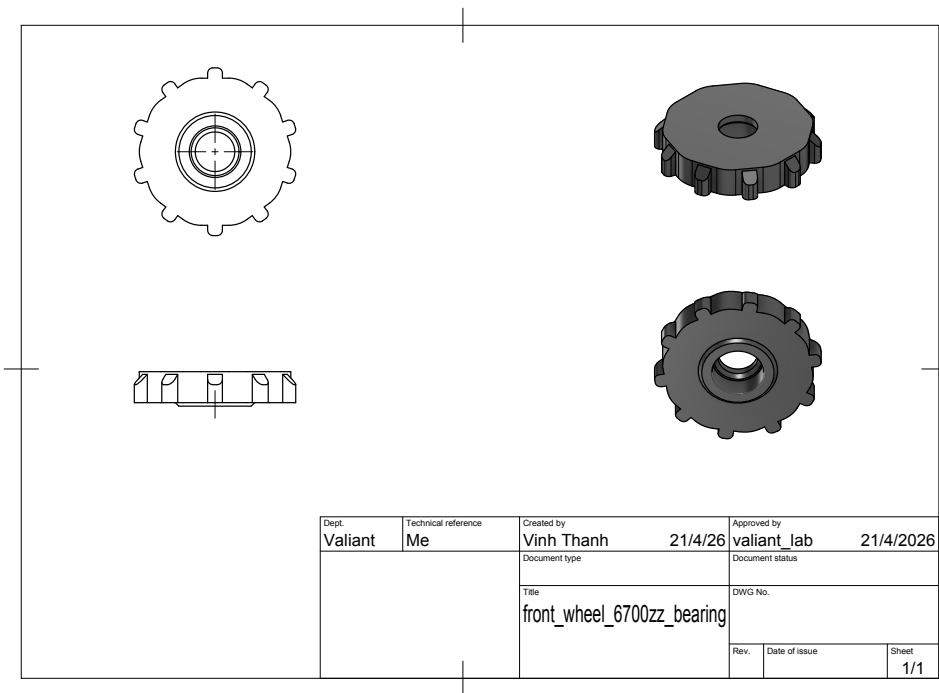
Front wheels with 6700zz bearingblueprint for MAVEN-01
